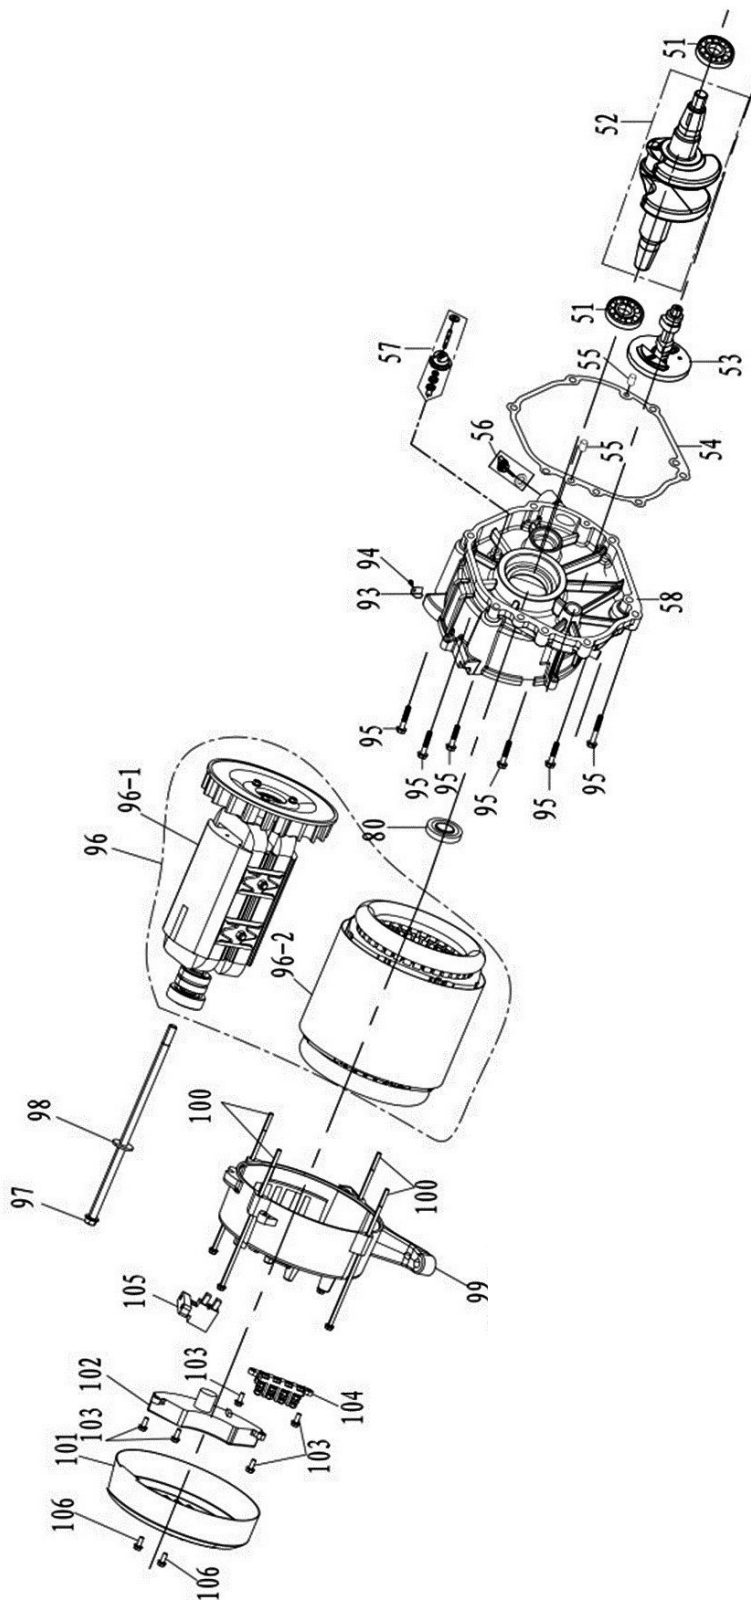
Spare parts drawing 3 PG-E 30 SRA
